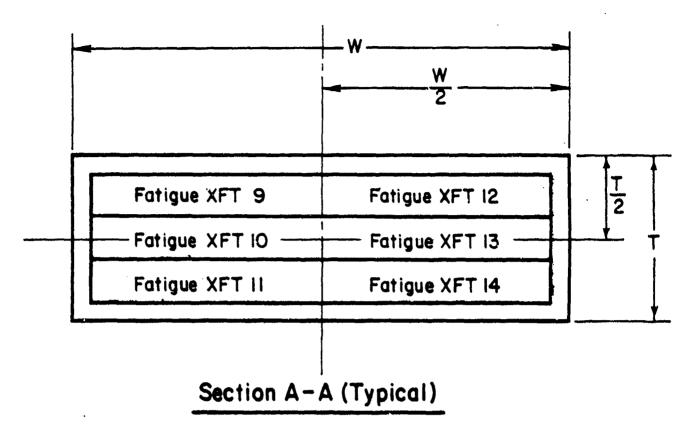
Specimen location for 7149-T73 hand forgings--Section A-A.
